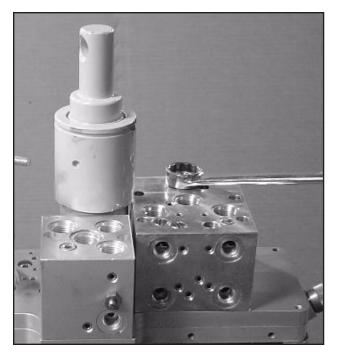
Use a 15/16" wrench or deep well socket to remove the P.O. Check valve assembly from the Super V Valve Block Assembly.
